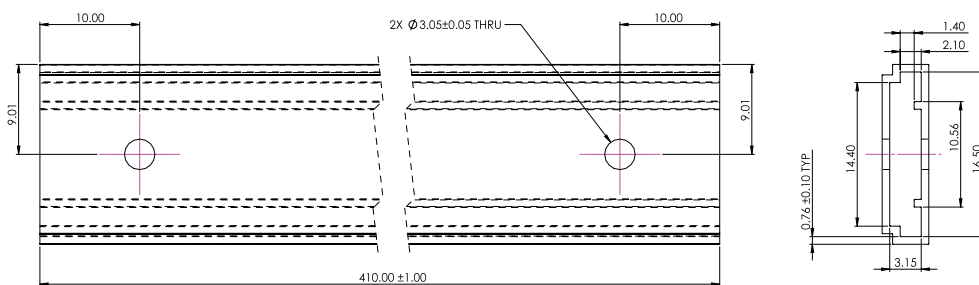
Tube dimensions for L2C5-xxxx1205E1100.
